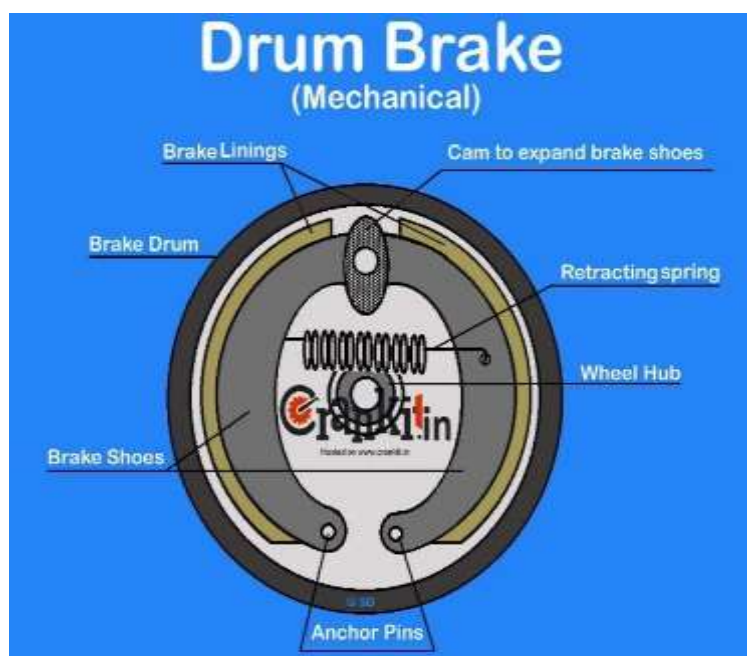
Mechanical Drum Brake in that Brake Applied Load by Driver on the Pedal Shifted to the Final Brakes Disc or Drum Rotor.
